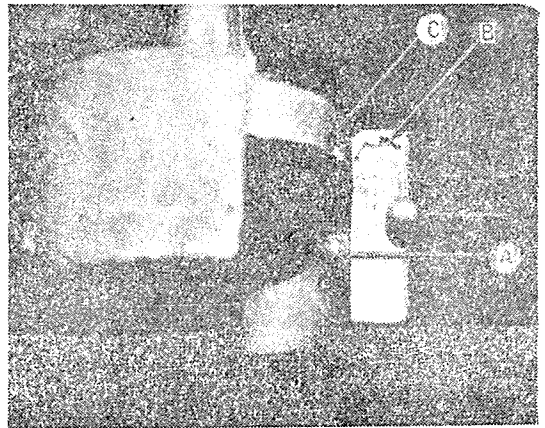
Surface defects in a gold casting, illustrating the various types that may occur. A, Air bubbles, B, water film, C, a foreign body inclusion. (Courtesy D. Vieira.)
